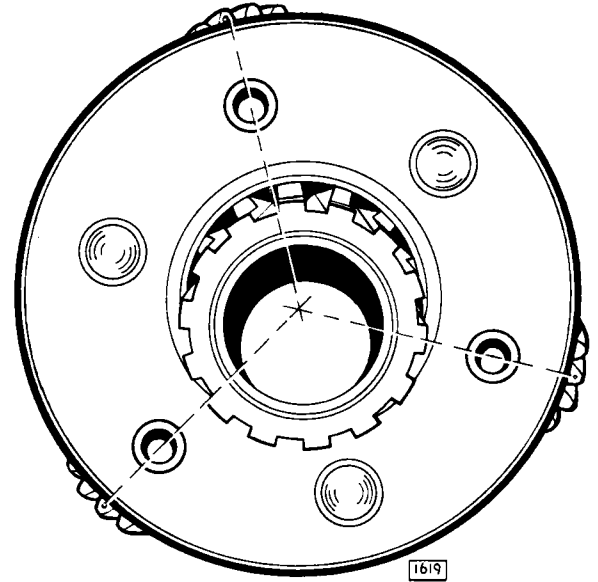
Assembling the planet gears—Note the positions of the marked teeth
